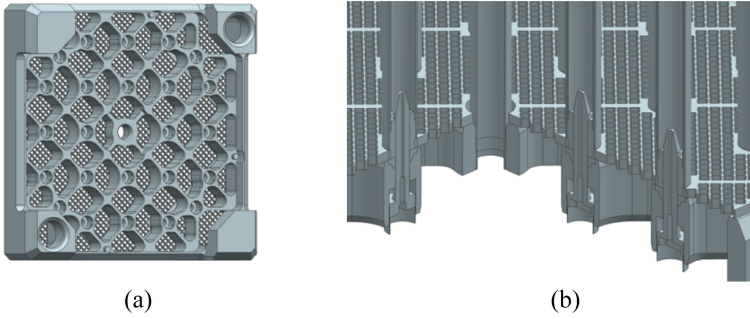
The lower end threaded connection between guide thimble tube and bottom nozzle
